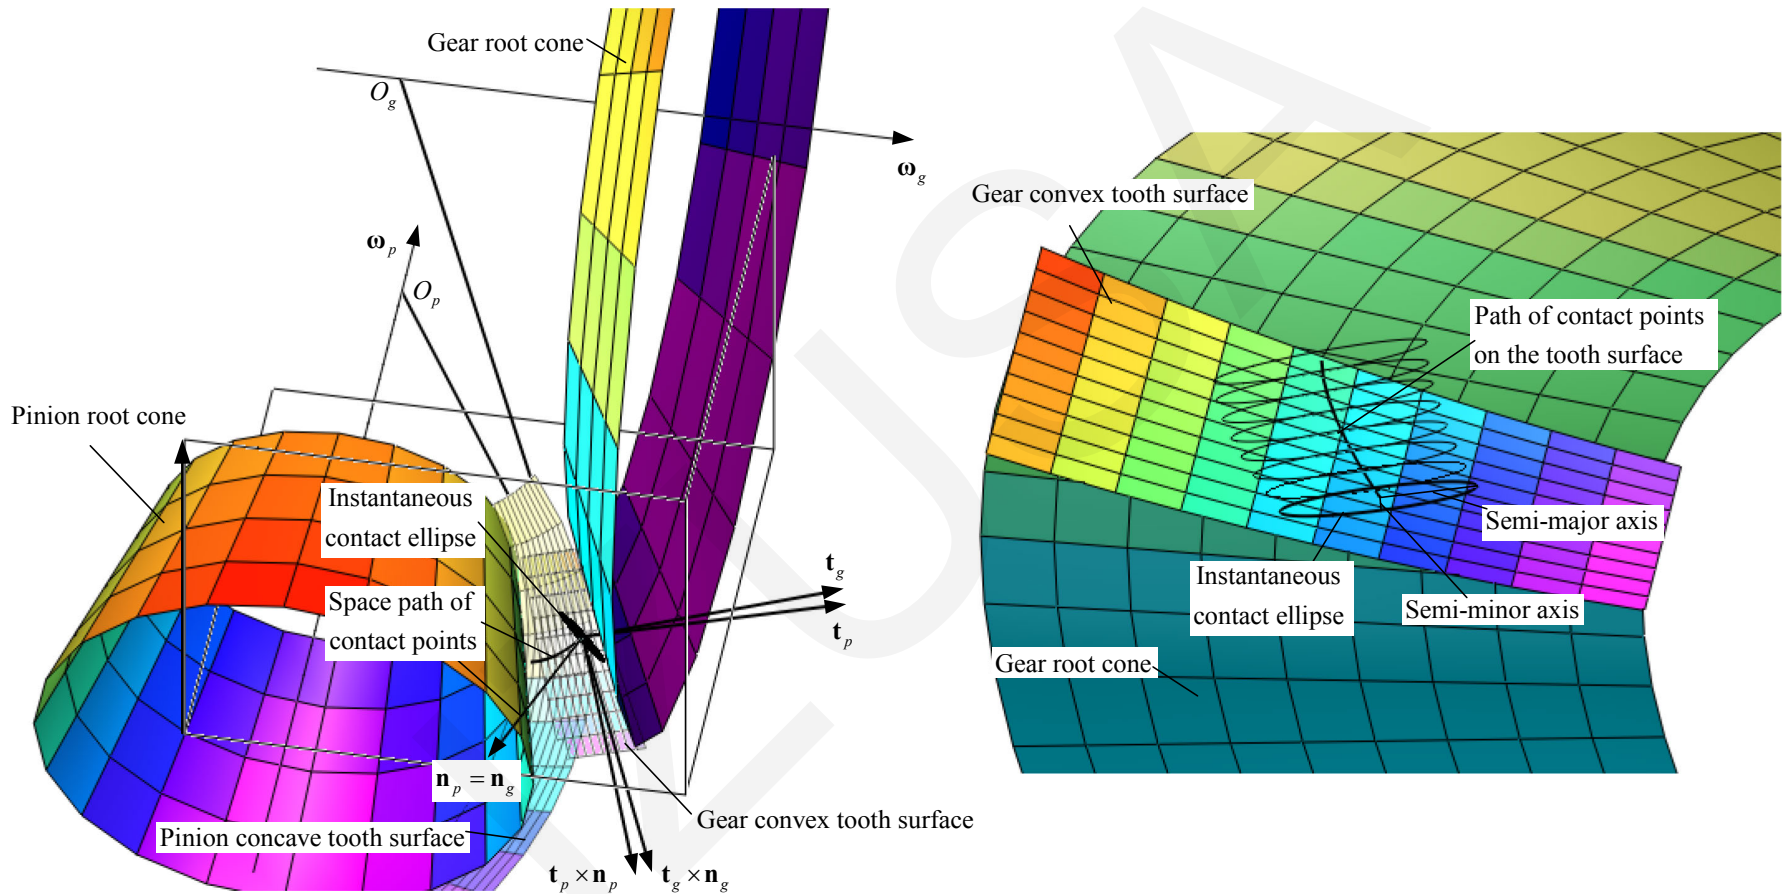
Optimized three-dimensional path of contact points and contact ellipses. (a) Contact pattern of the gear drive. (b) Contact pattern of the gear tooth surface.
